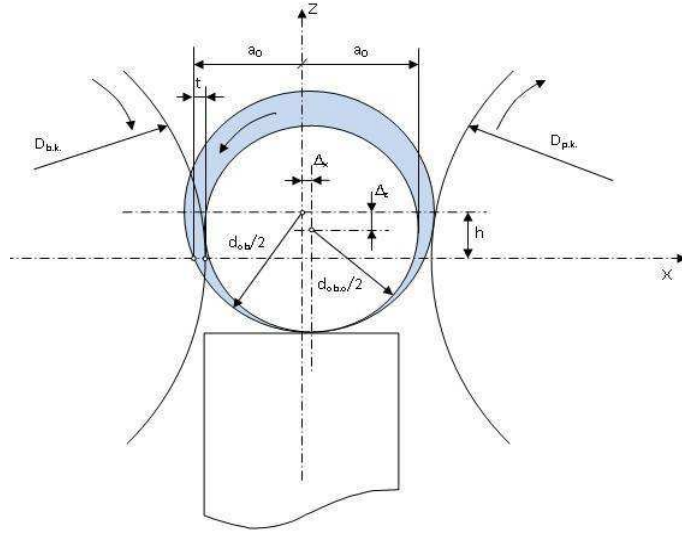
Scheme of instant positioning of the workpiece when in-feed grinding
